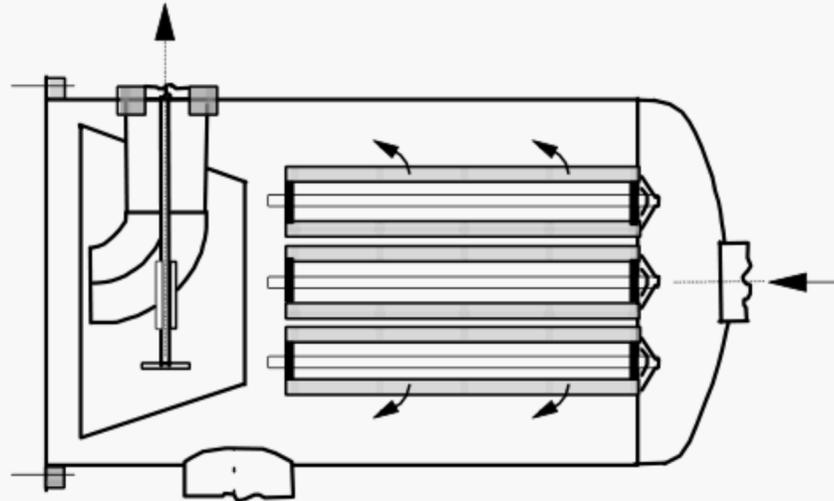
Filter water separator vessel with large basket-type separator before conversion
